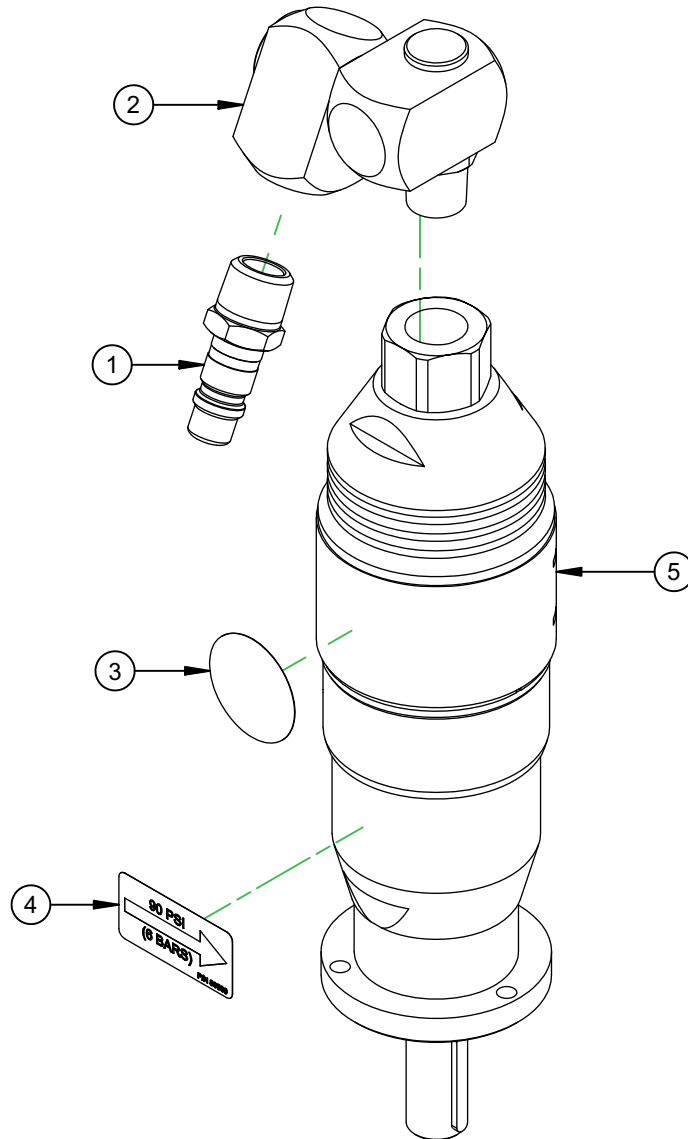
PCU ASSEMBLY PARTS LIST (P/N 78264)
